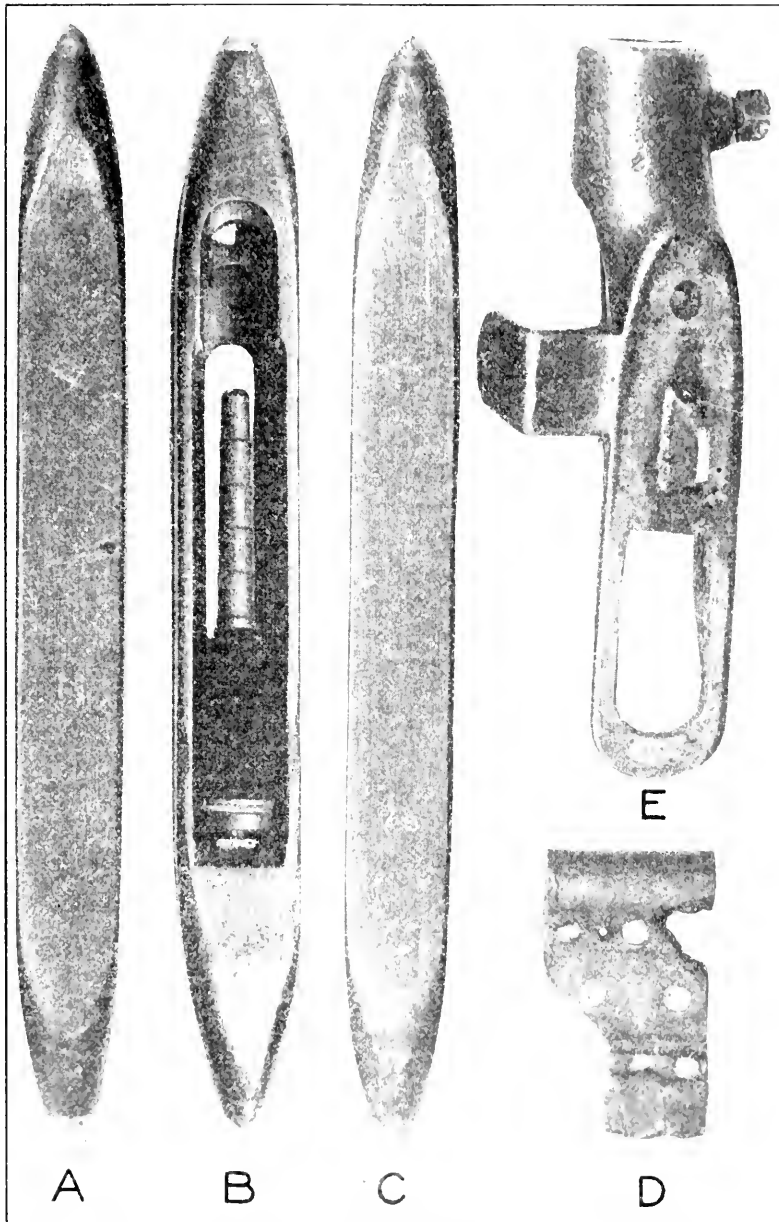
Worn Parts of Loom Causing Shuttle to Fly Out.
